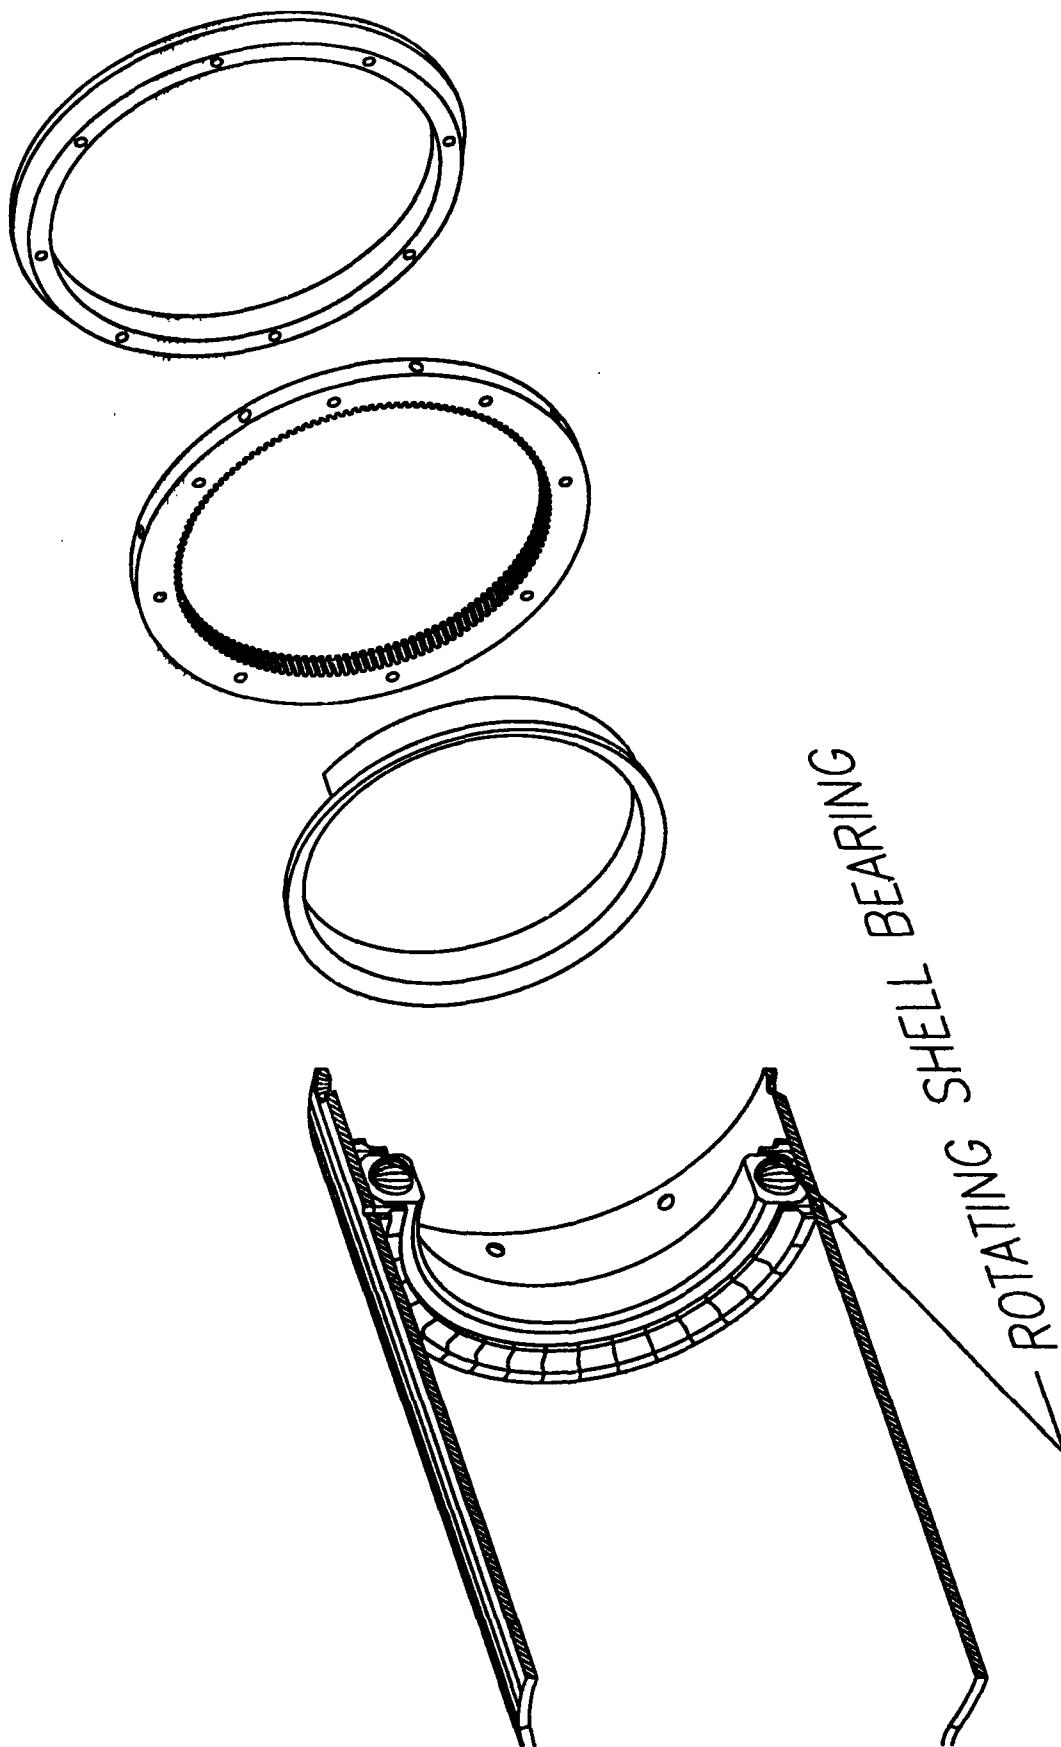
Detail of the Forward End of the Rotating Shell, Showing the Forward Bearing Mounting
